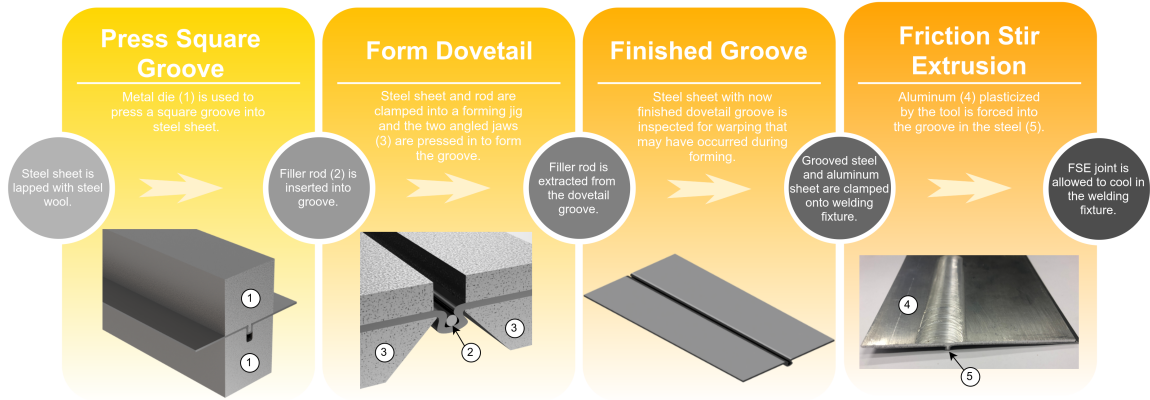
Process for forming dovetail groove in sheet steel and performing a thin sheet Friction Stir Extrusion.
